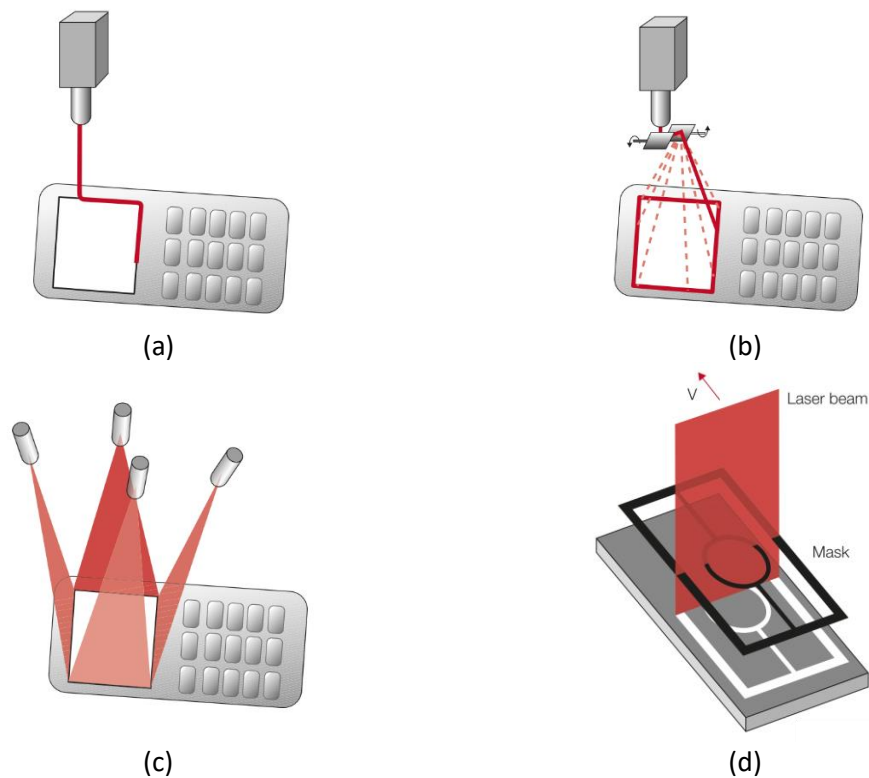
Schematics of the basic process types used in TTLW, more specifically (a) Contour welding, (b) Quasi-simultaneous welding, (c) Simultaneous welding and (d) Mask welding [14].
